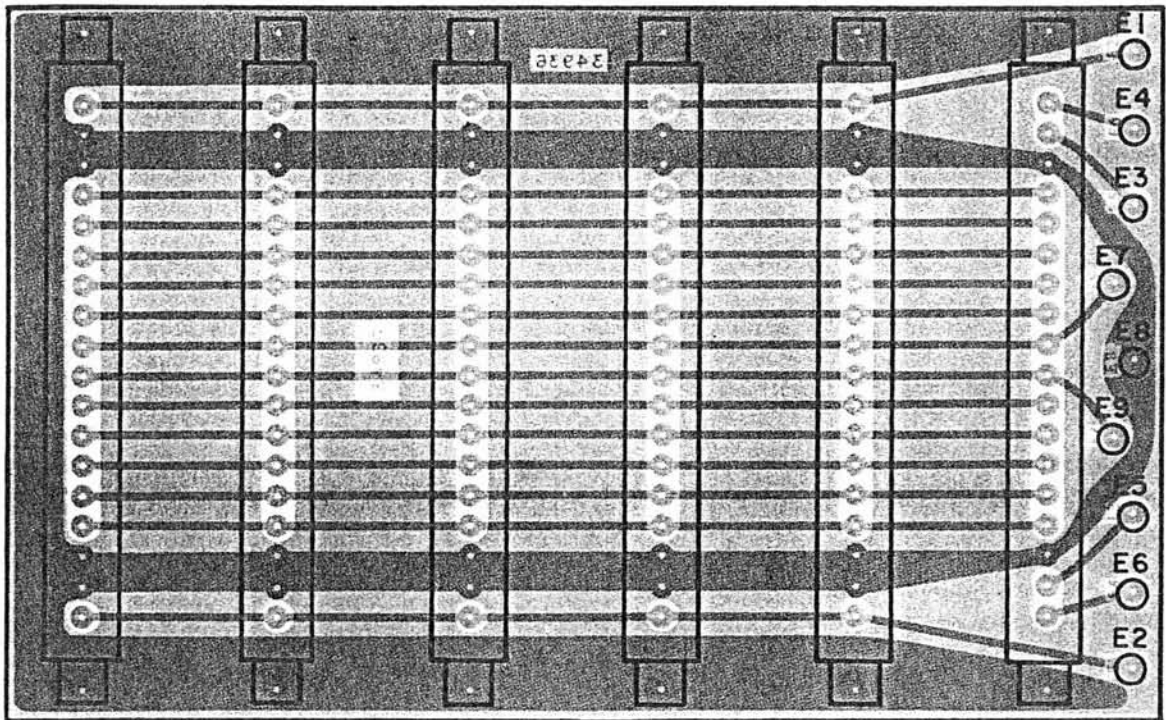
Type 34936 Filter, Motherboard (A1A7), Location of Components
